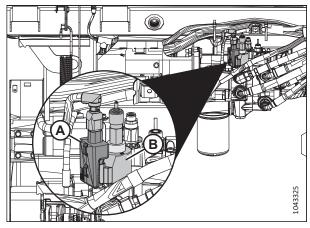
Draper Speed Control Module – Integrated Hydraulic System
